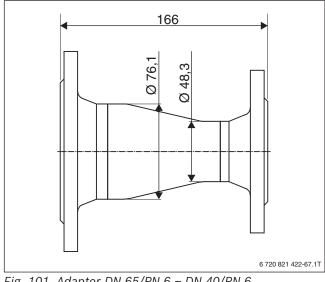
Adaptor DN 65/PN 6 – DN 40/PN 6 (dimensions in mm)
